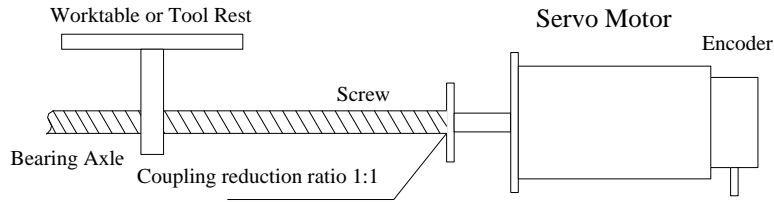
Servo motor and screw sharing same axle (without reduction gearbox)
